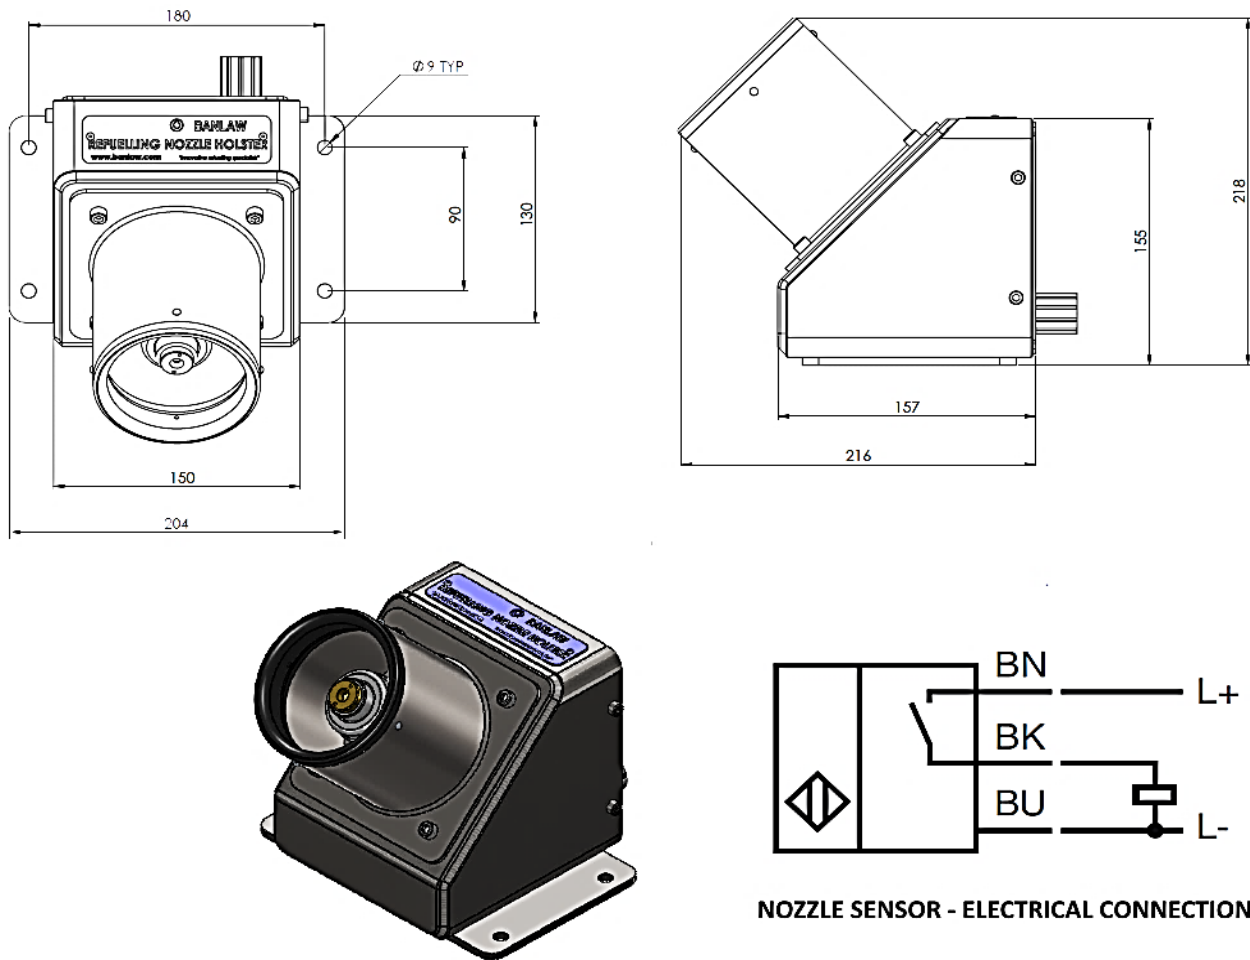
Short Holster Dimensions (mm) and Wiring Diagram
